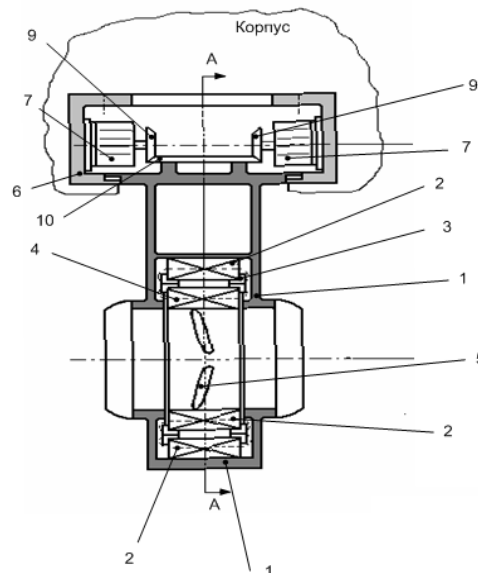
Steering gear column with electromagnetic driver without a shaft
